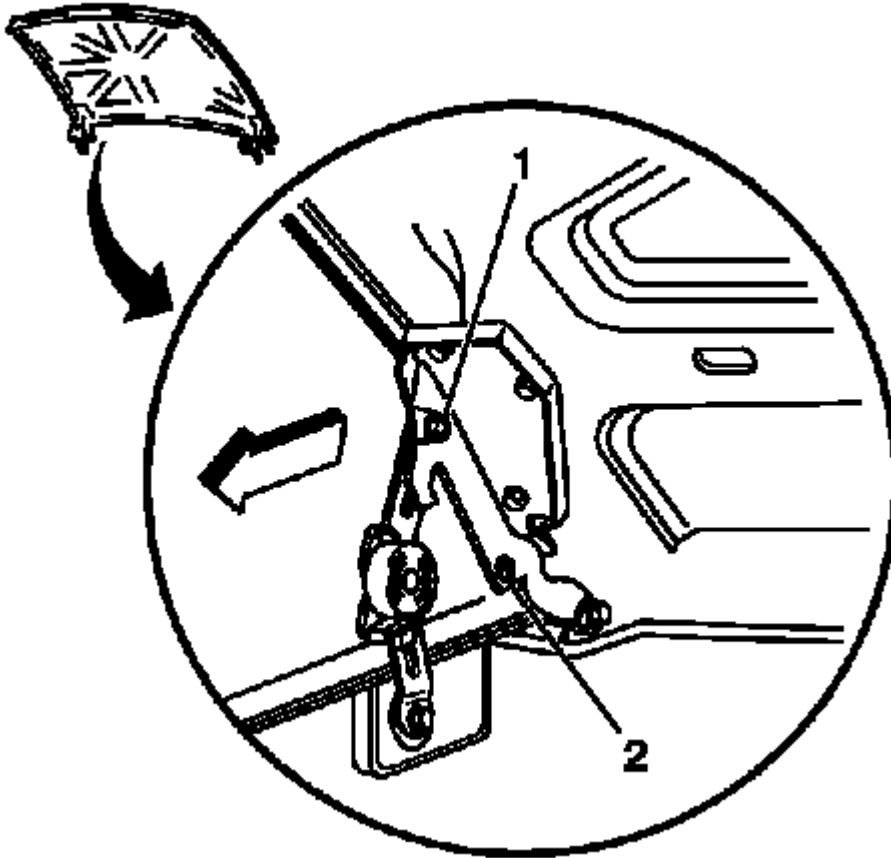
Identifying Hood Hinge Normal And Service Position Bolt Holes
